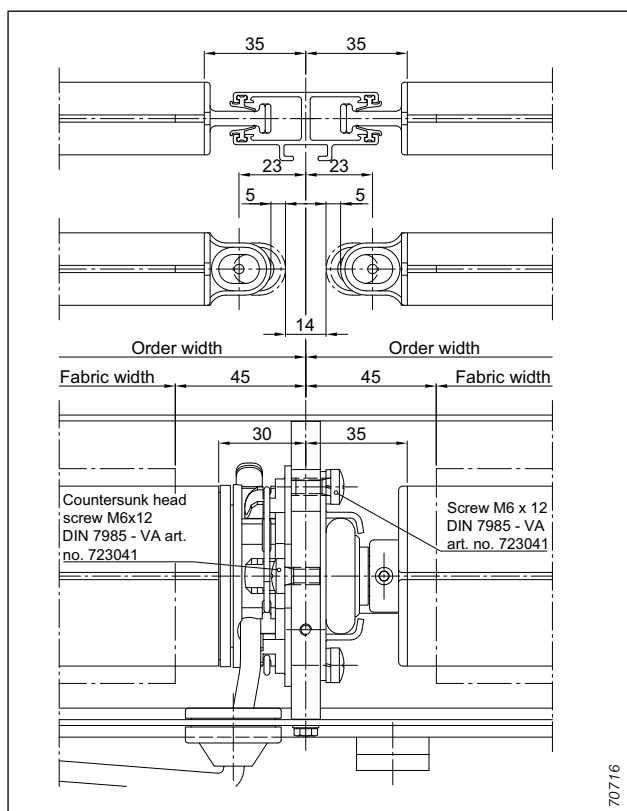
Possible couplings and series-mounted units for type 499: motor – end bearing, centre, continuous cover panel
